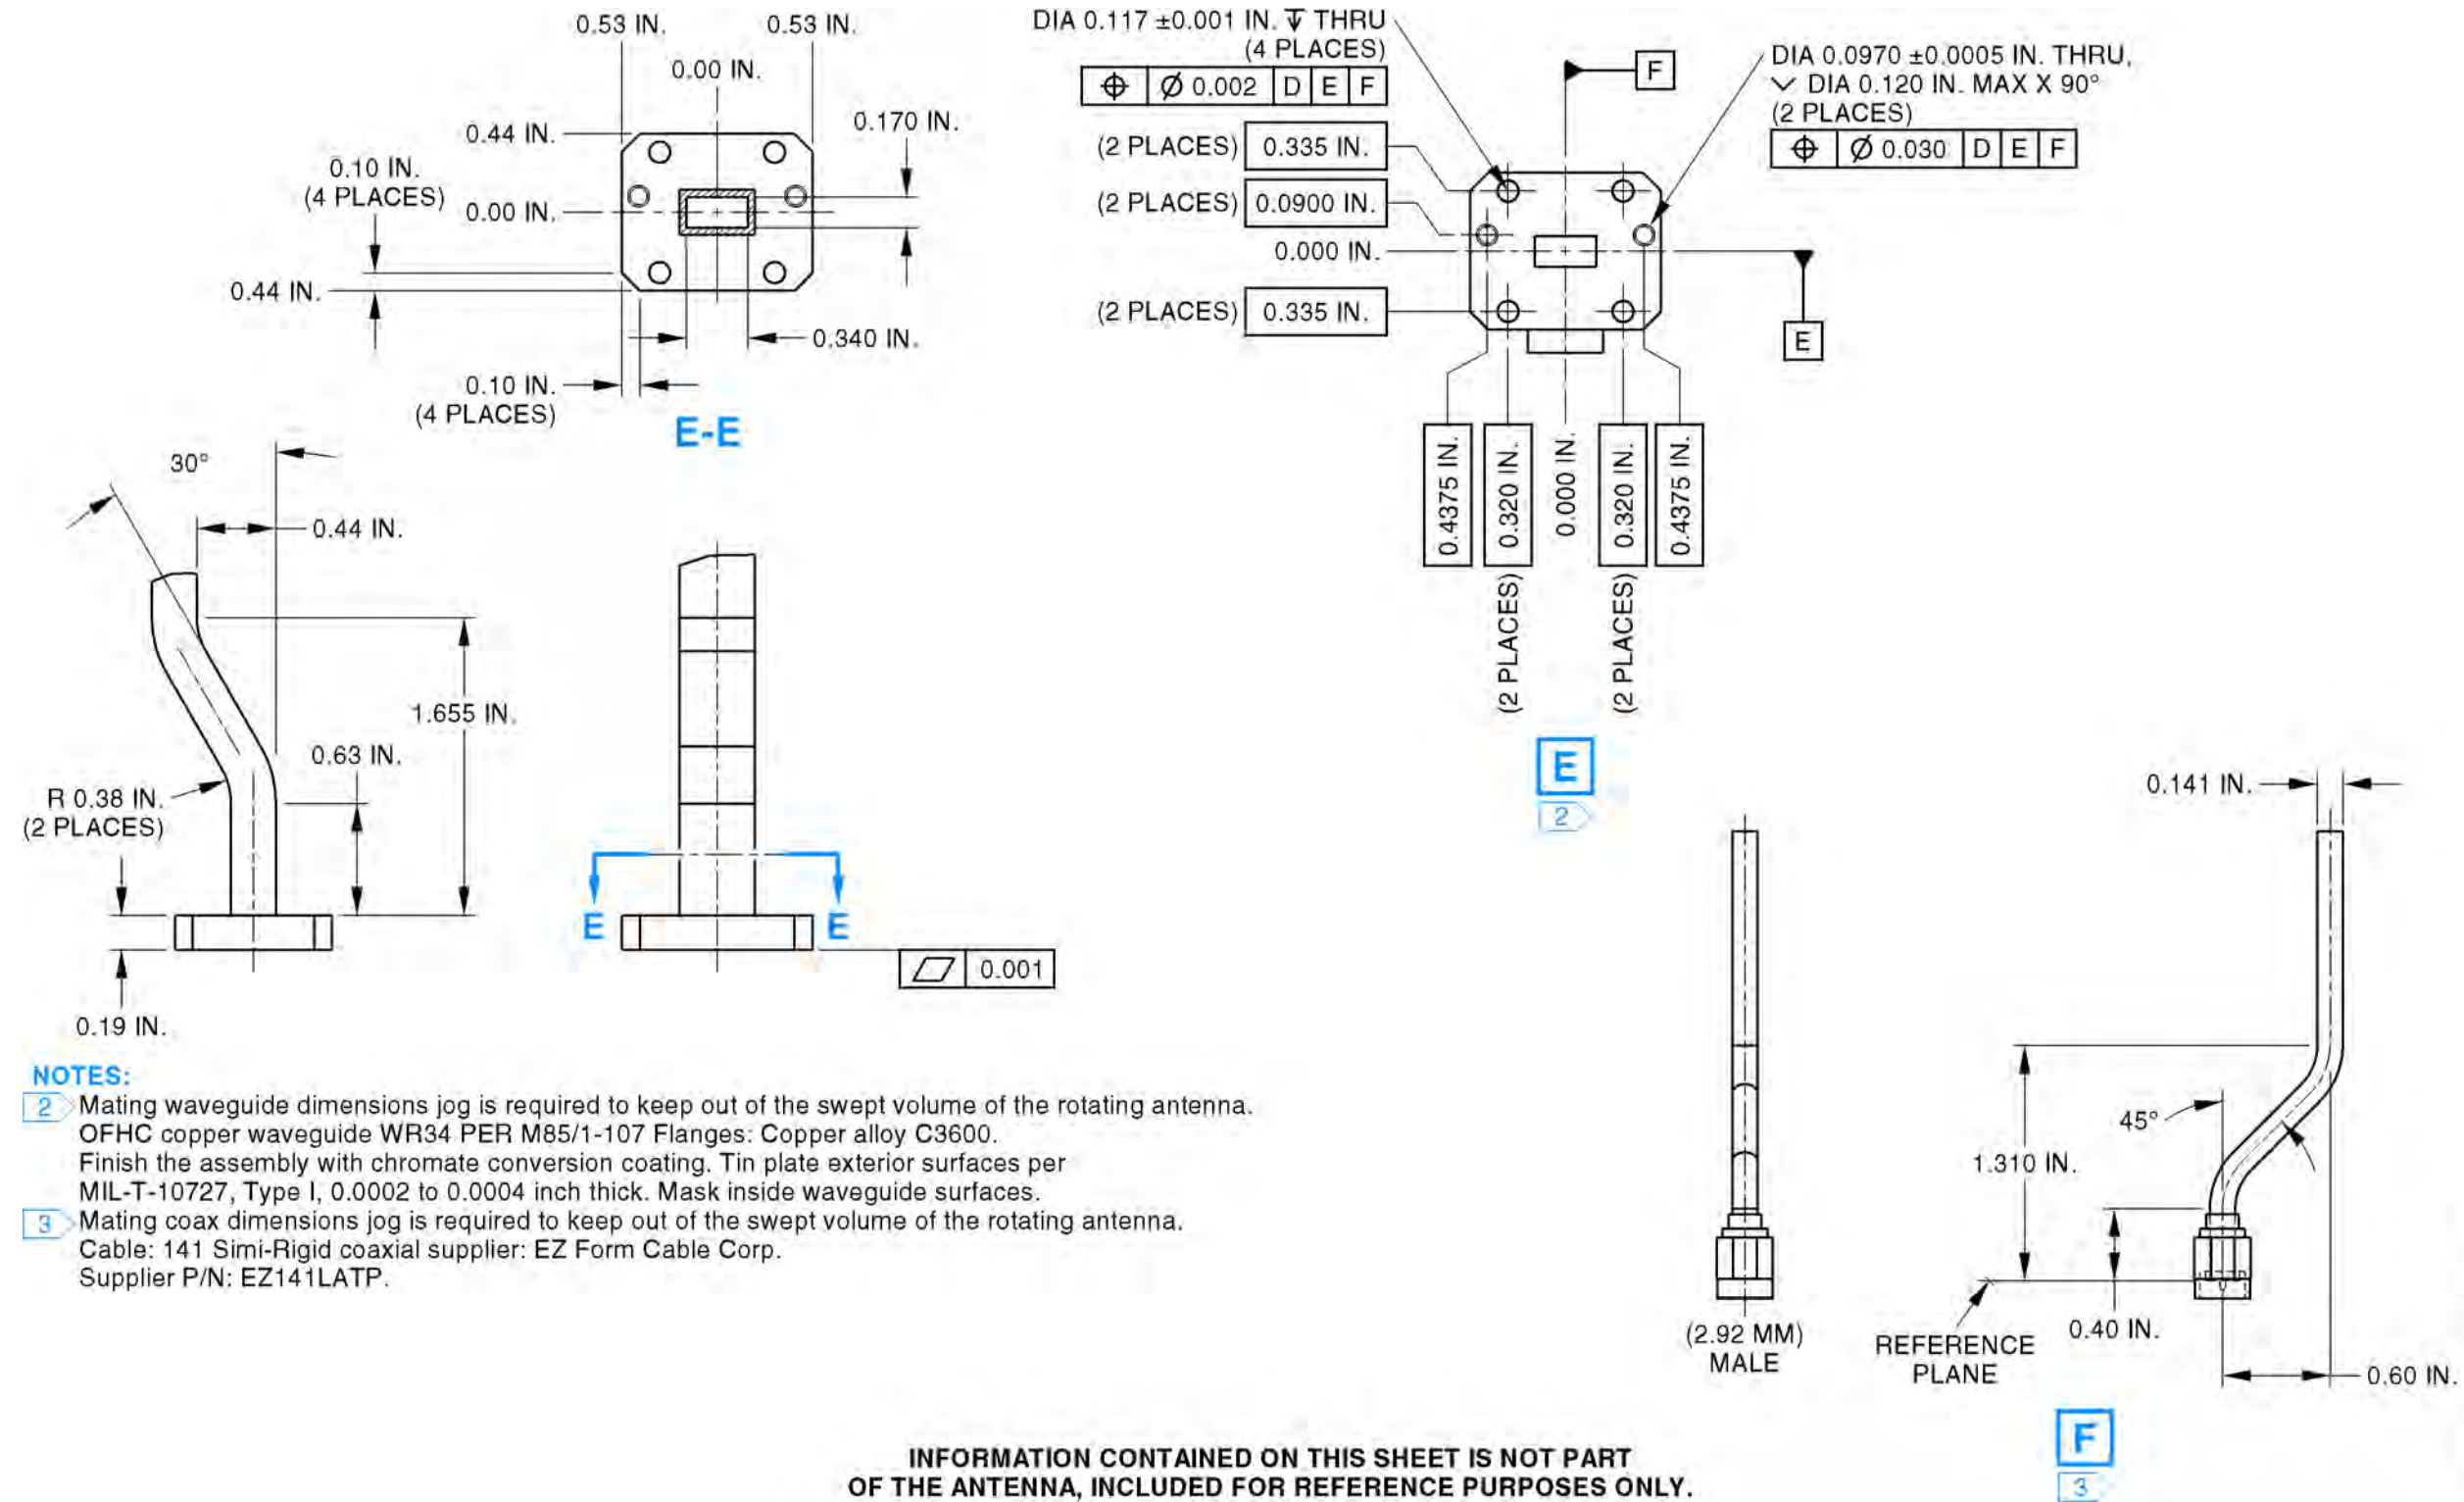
FMA Outline and Installation Drawing (Sheet 9 of 12)
